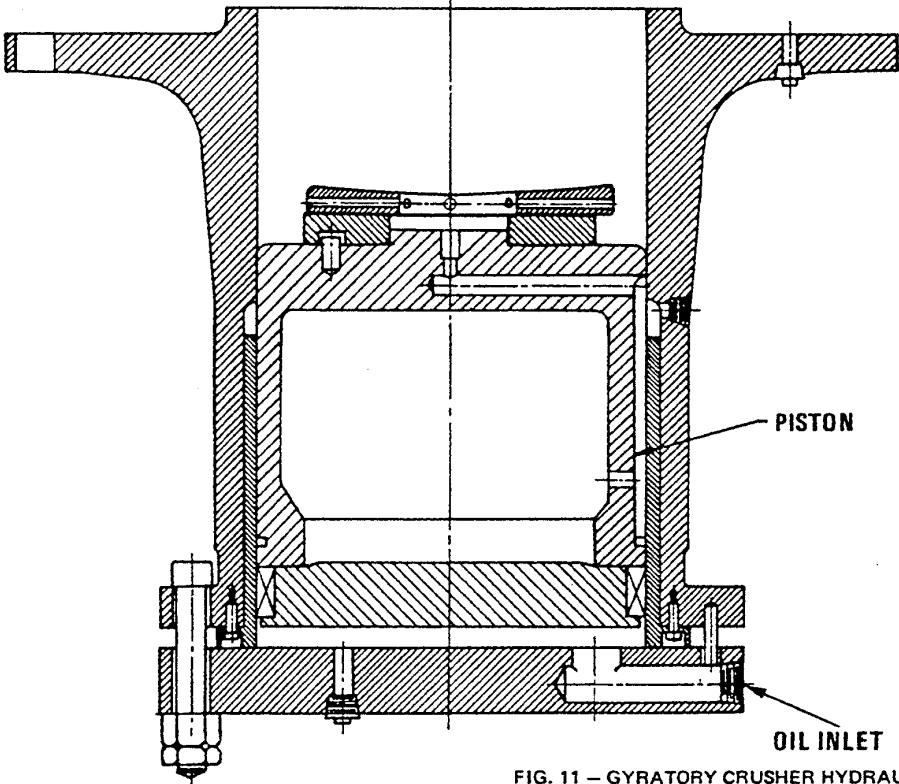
GYRATORY CRUSHER HYDRAULIC SUPPORT.
